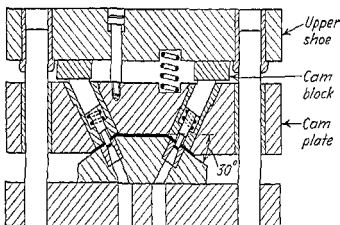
Cam-piercing die design for movable cams integral with punch holder. (Design Service Co.)
